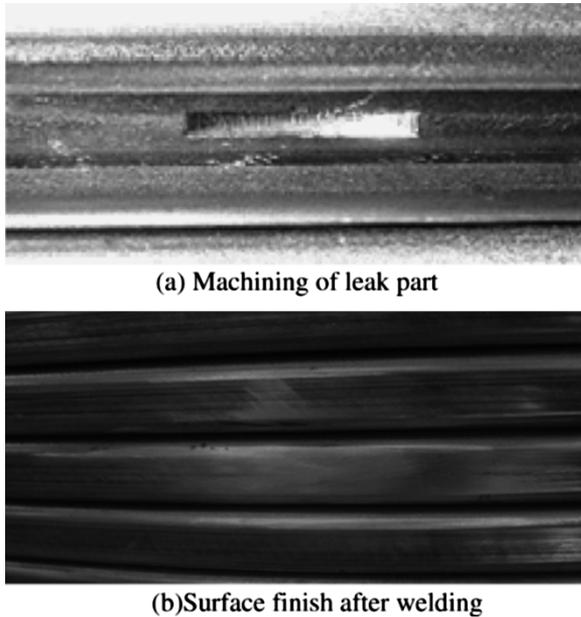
Machining (a) and surface finishing part (b) of repair process.
